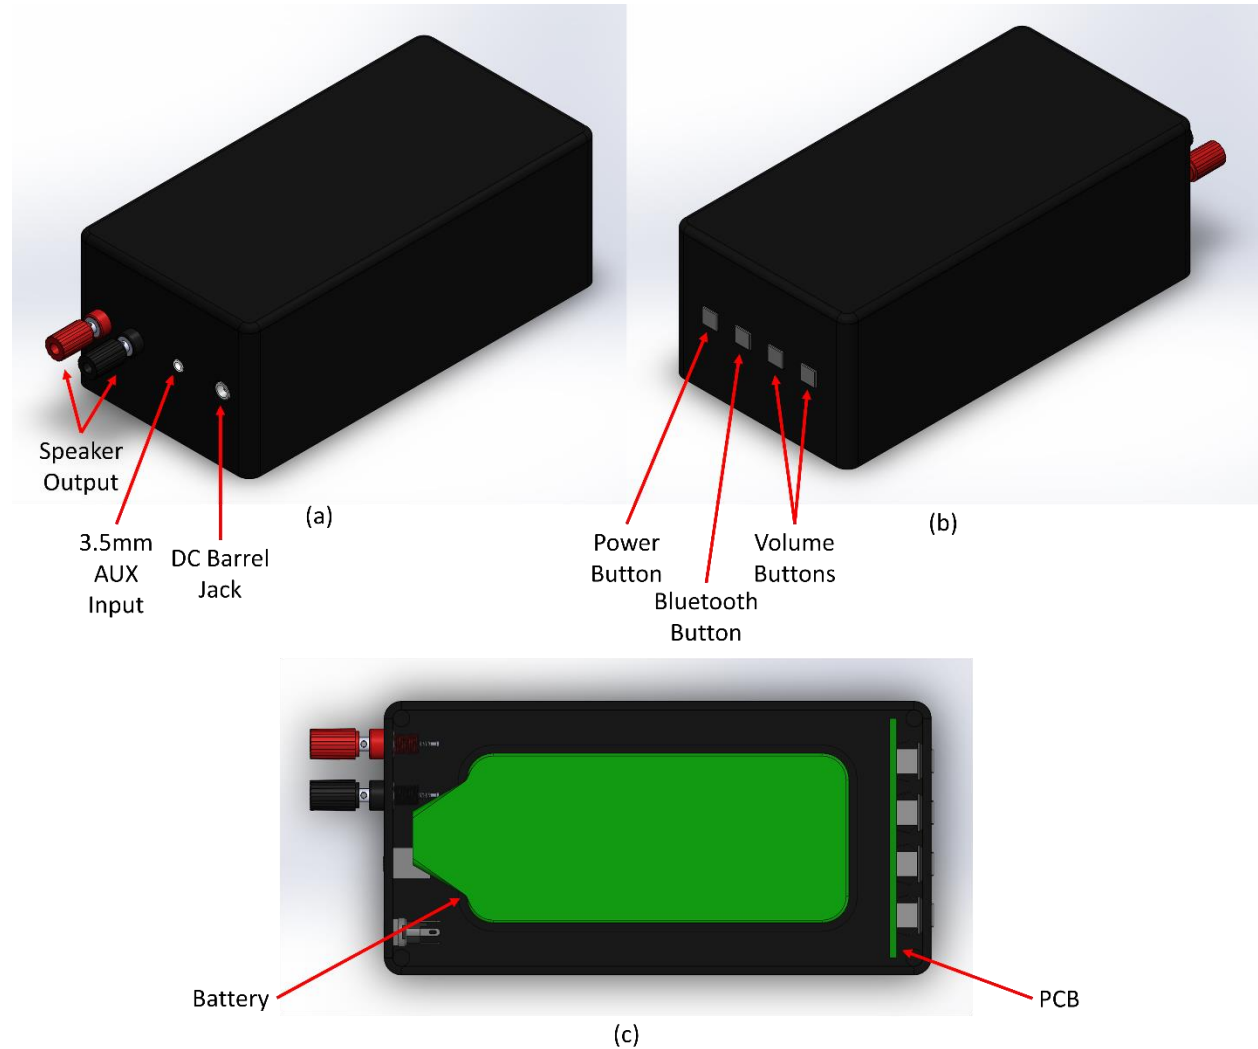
High-Level Physical Design Model of the (a) Rear View, (b) Front View, and (c) Top View (with Lid Removed)
